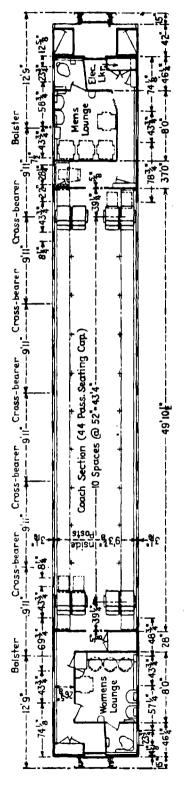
Floor Plan of Typical Passenger Railcar Coach
